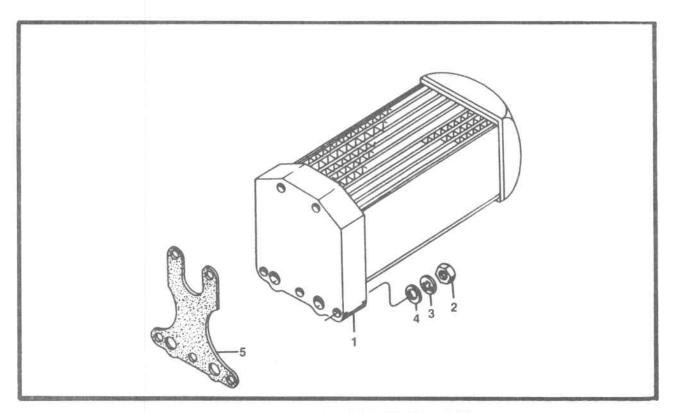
A. OIL COOLER (IO-470-F).
